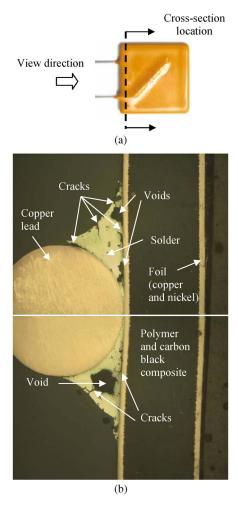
Optical microscopy photographs of solder. (a) Cross-sectional location and view direction. (b) Cracks and voids in the solder.
